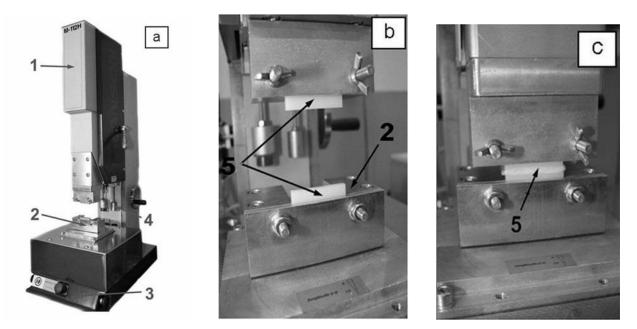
Vibration welding station: a) general view: 1 – upper tooling moving unit, 2 – vibration head with lower tooling, 3 – control desk, 4 – control system, b) view before welding process: 2 – vibration head with lower tooling, 5 – components to be joined, c) view of the machine after the welding process: 5 – produced joint.
